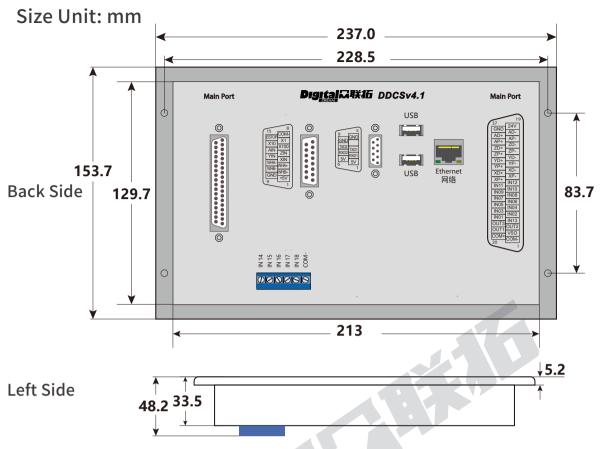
DDCS V4.1 Back view, Side view and dimensions
